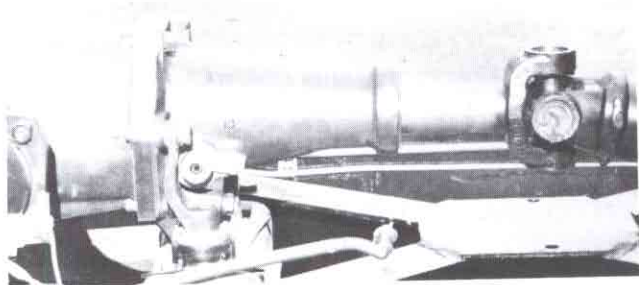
shows how a late '58-'60 used a short piece for connection. Also, hex head bolts are used to hold the header to the side rails.
